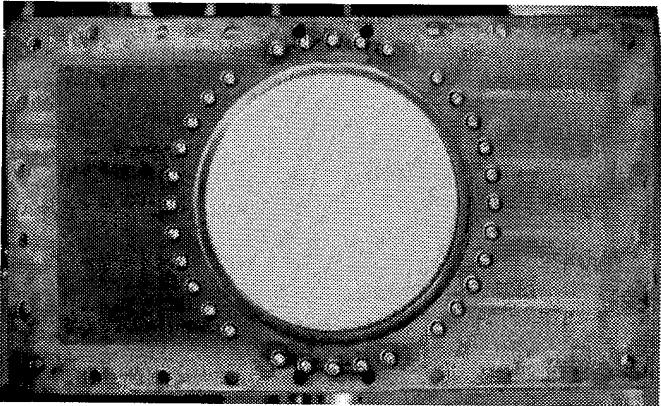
Air side (WR2100) flange showing the number of bolts required to provide the necessary force to make the vacuum seal.
